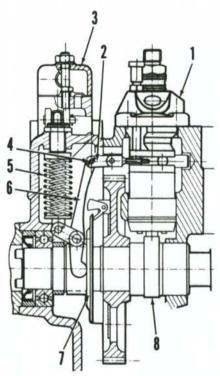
Cross-sectional view of injection pump and governor assembly.
